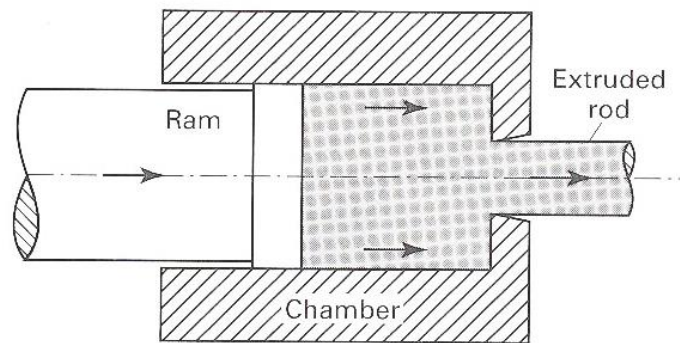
Schematic of the extrusion manufacturing technique. A ram or screw pushes the material through a die to create the desired shape. Similar to extrusion, injection molding uses the same technique to flow material, with the difference of having a mold at the end of the chamber [17].
